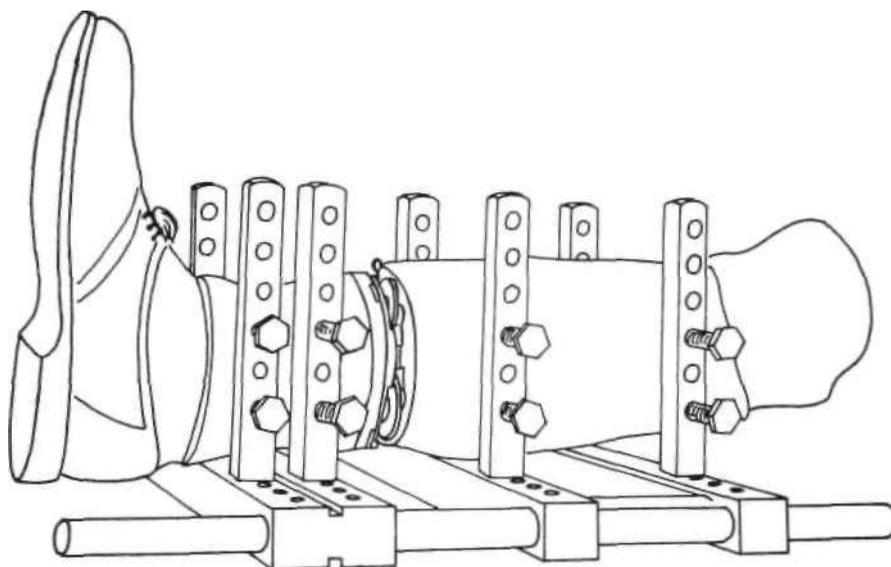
Special band-saw jig used by Danes during alignment transfer. This jig holds components of the prosthesis in a fixed position to allow parallel band-saw cuts on both sides of the coupling. Subsequent clamping after cementing of wood block to replace coupling is also facilitated by this device.
